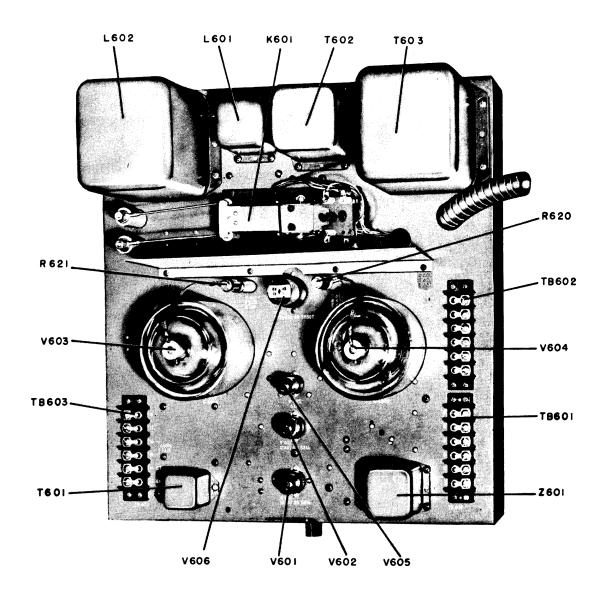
Modulator Assembly, Audio Chassis, Top View, Location of Parts
